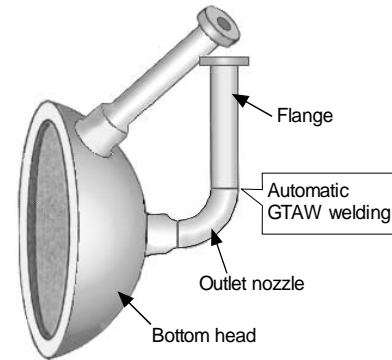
An example of automatic GTAW application for joining the 90-degree bend and flange extended from the bottom head of a reactor pressure vessel.
